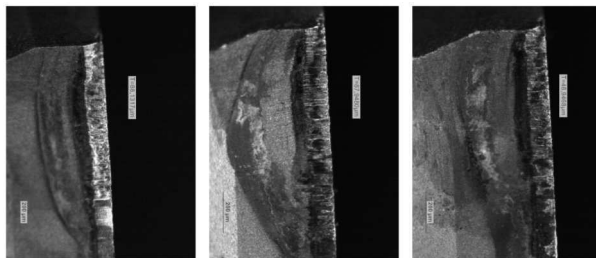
Examples of flank wear of reaming head MT3 with coating HSN² [9]
